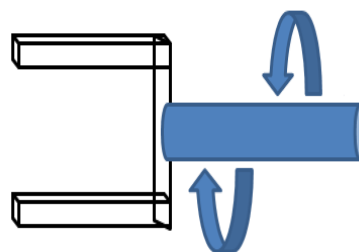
Camera U-shaped aluminum manipulator with high power motor
